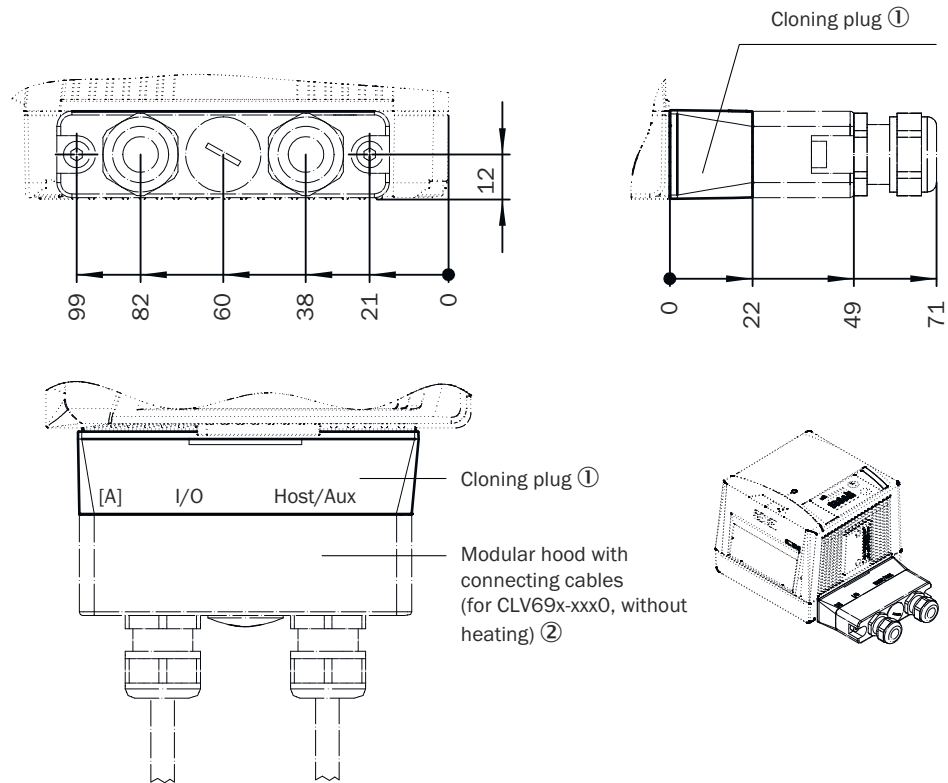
Dimensions of cloning plug A (D-Sub), with the hood of a connecting cable. All dimensions in mm.
